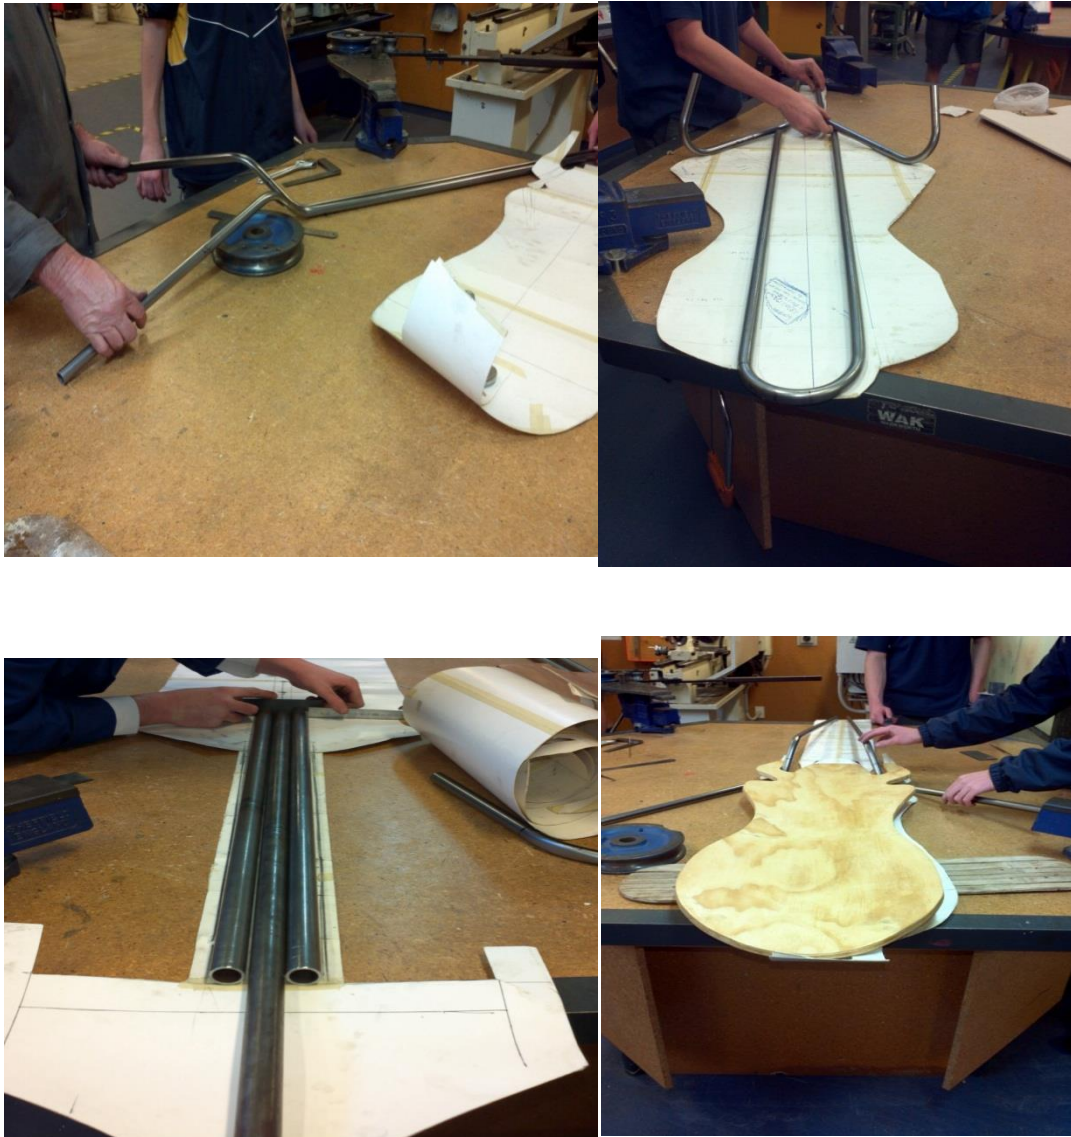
Bending rods and their alignment with the cardboard pattern.
